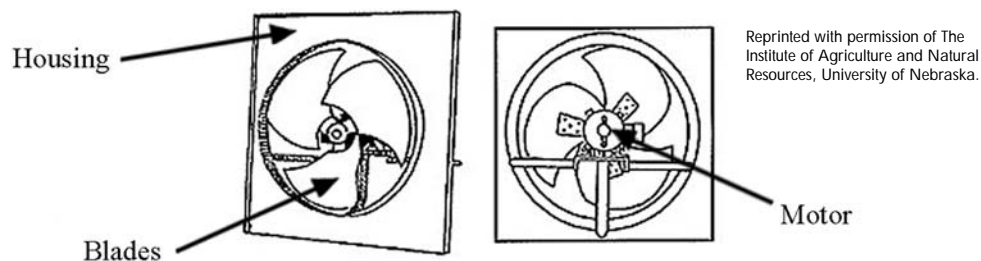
Propeller direct-drive fan (front and rear view).
